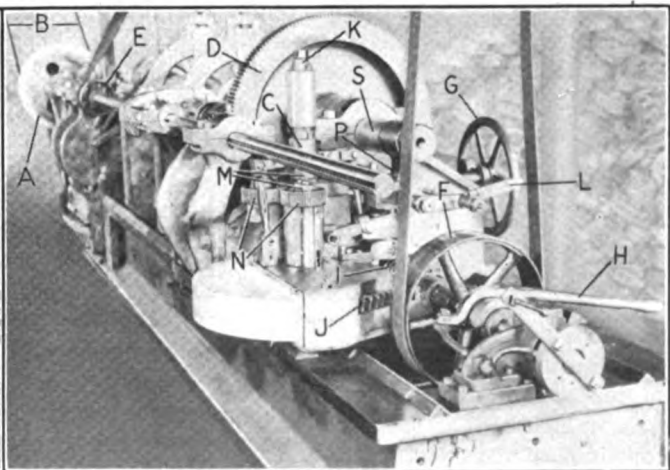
REAR VIEW OF LATHE WITH WORK IN PLACE
